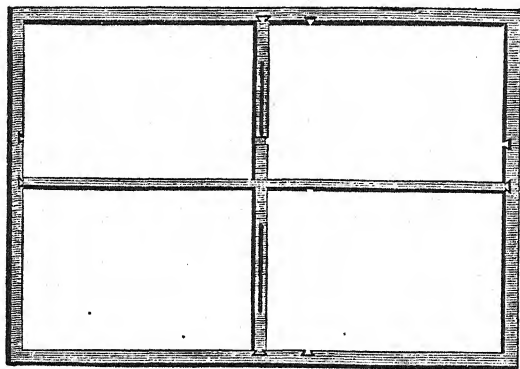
CHASE SHOWING GROOVES FOR POINTS.
